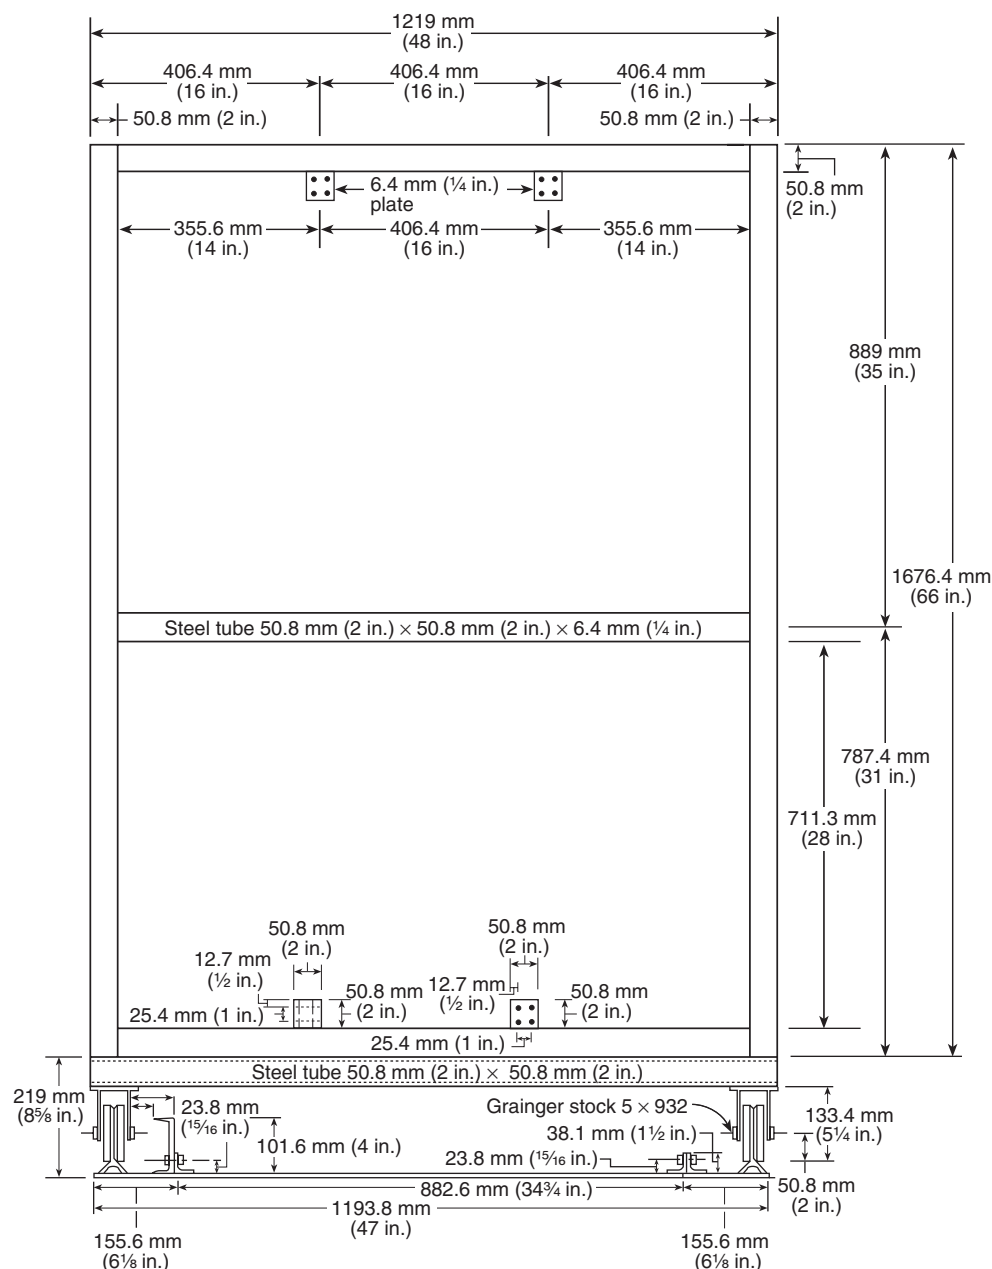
(b) Side Elevation of the Test Apparatus.
